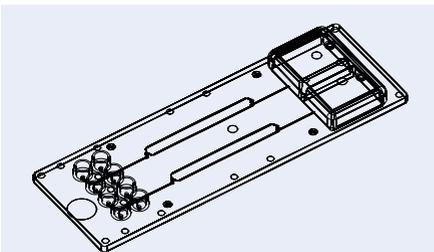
Schematic drawing of a straight channel chip with waste chamber 272 to be equipped with double-sided adhesive tape
